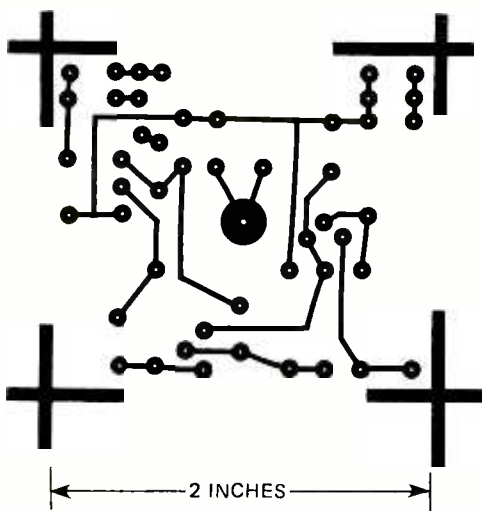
FOIL SIDE OF THE PC BOARD. Parts list gives details on purchasing an etched, drilled and tinned board.
